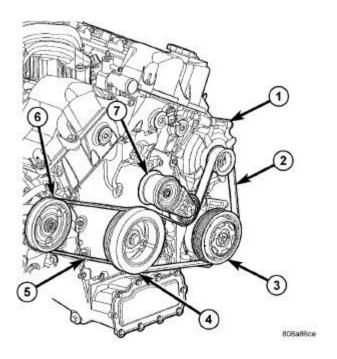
Accessory Drive Belt System - 2.7L Courtesy of CHRYSLER LLC
